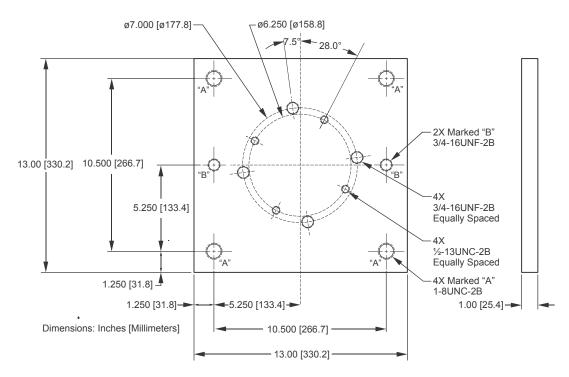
Mounting Plate Dimensions 20K - 125K
